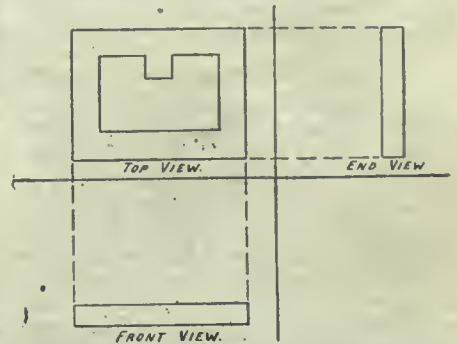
ORTHOGRAPHIC DRAWING OF THE STEAM CHEST COVER REARRANGED SO AS TO CONFORM TO STANDARD USAGE.
